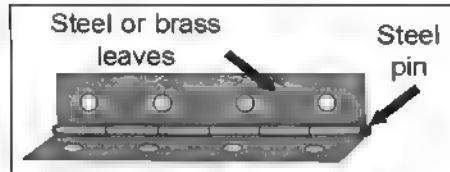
Construction of a typical hinge showing the pin/leaf bearing interface.
